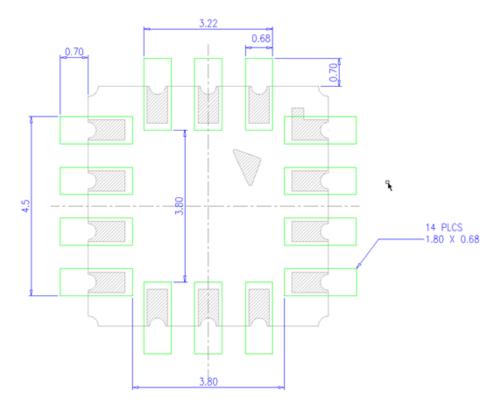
PCB Footprint Pattern and Dimensions (in mm)
